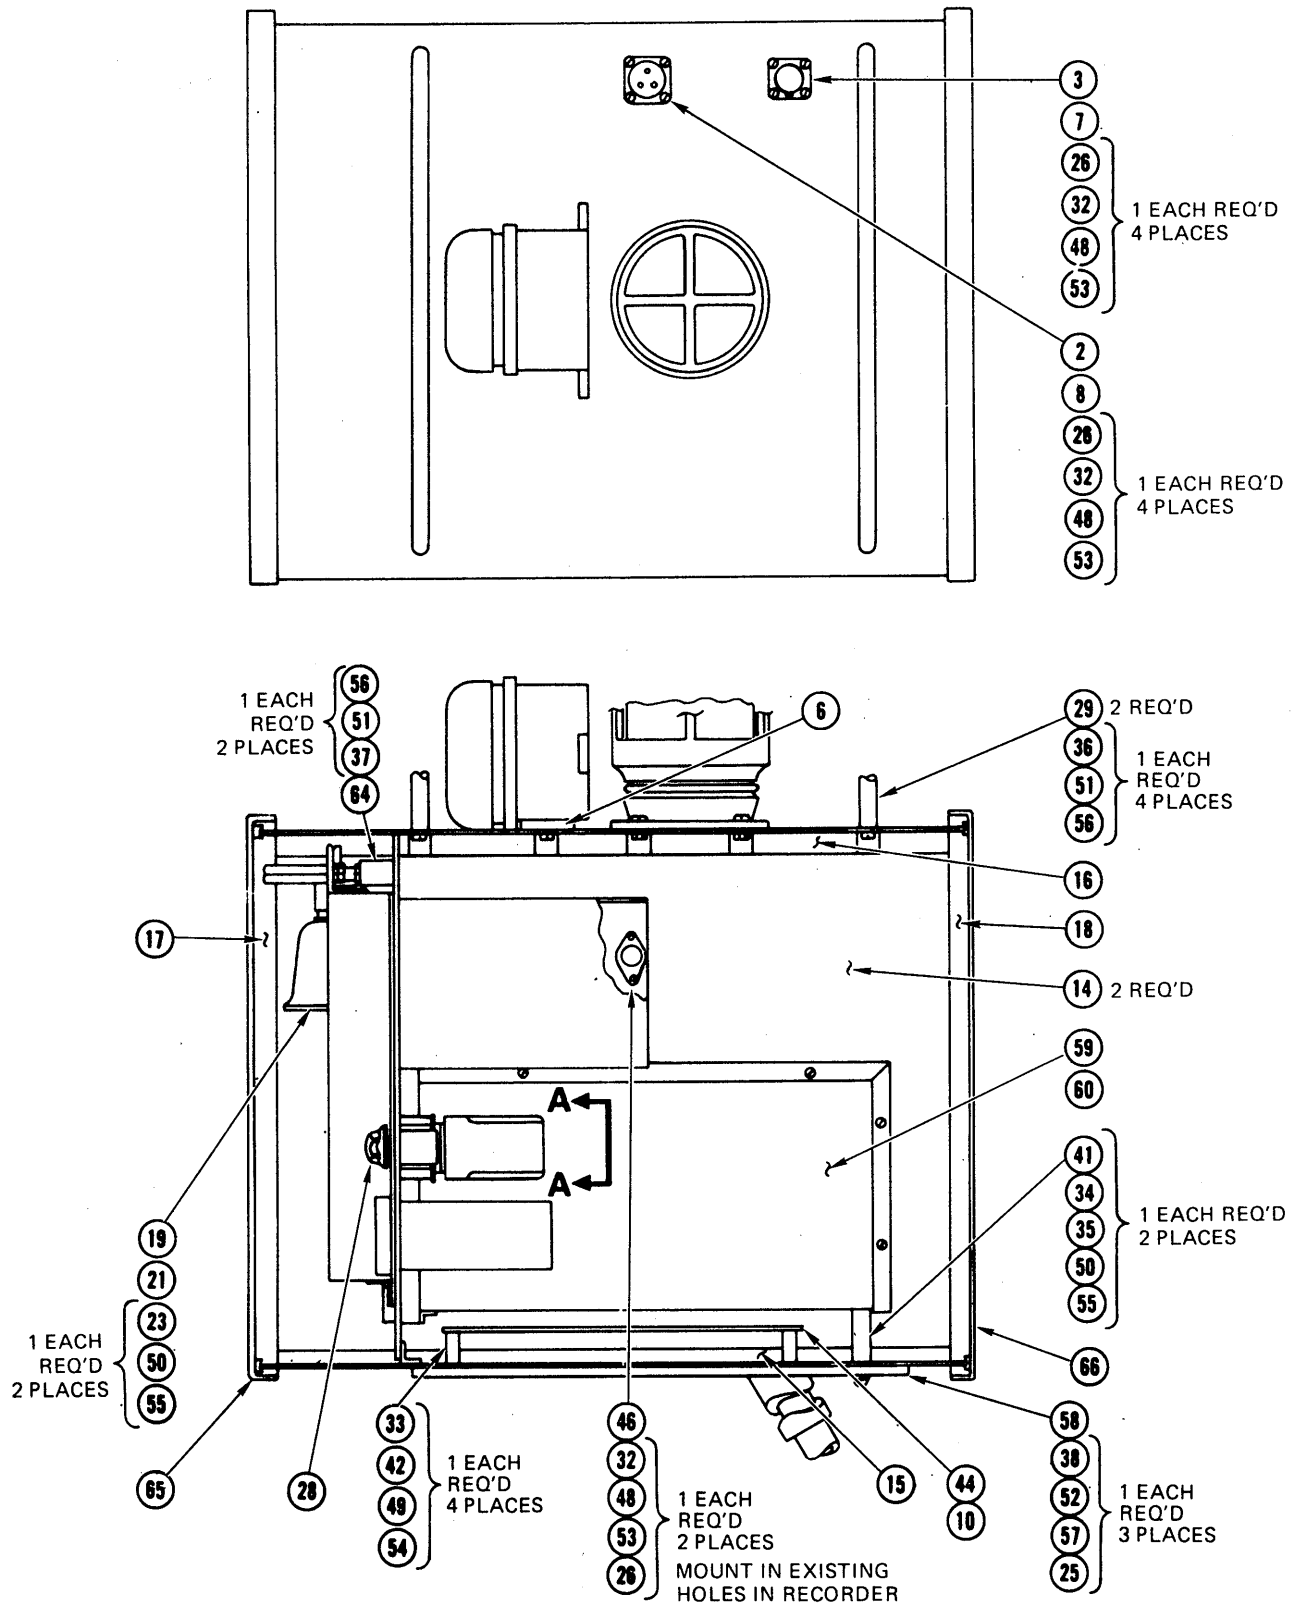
Batch Interface Detector Assembly (Sheet 2 of 2)
